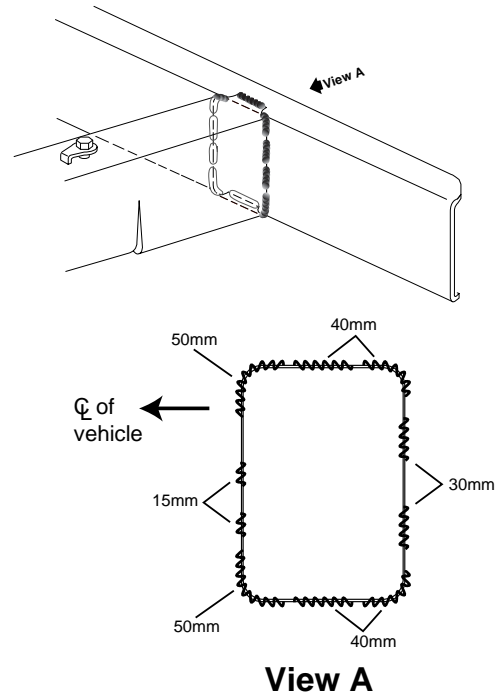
Weld Perimeter of Joint, as Indicated
